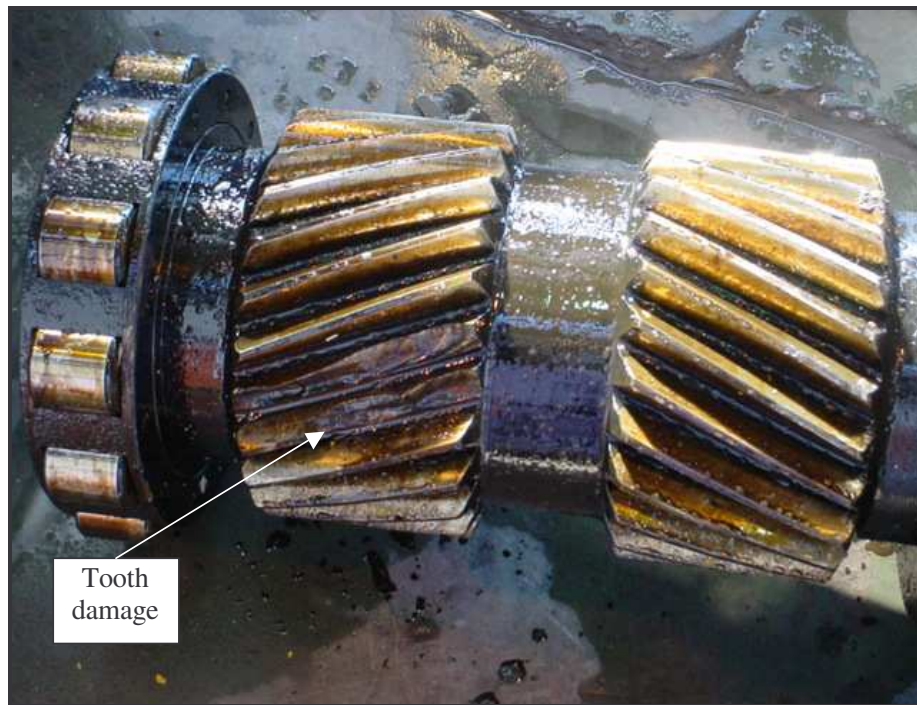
Tooth damage on the left gear set of the monitored pinion.
